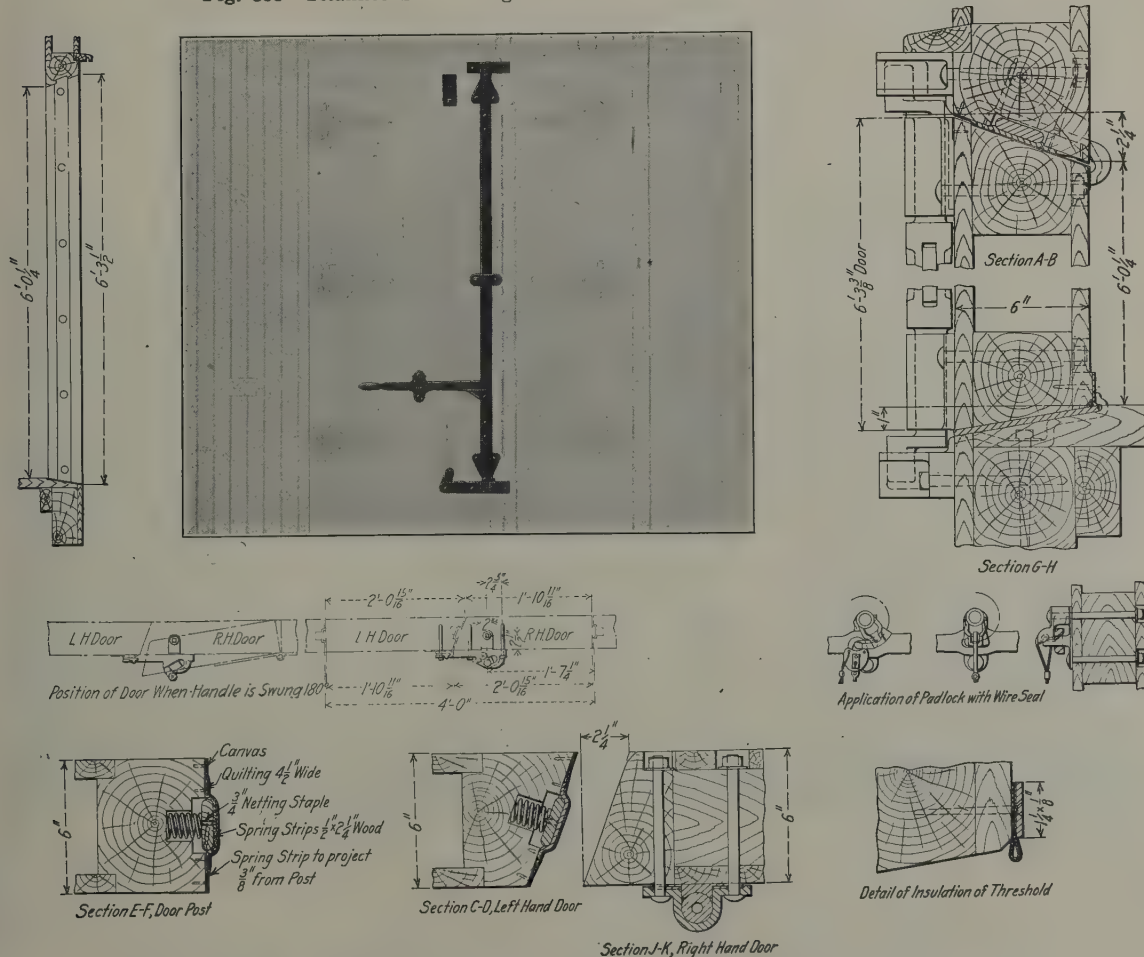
Miner Refrigerator Car Door Fastener and La Flare Insulation. W. H. Miner.
